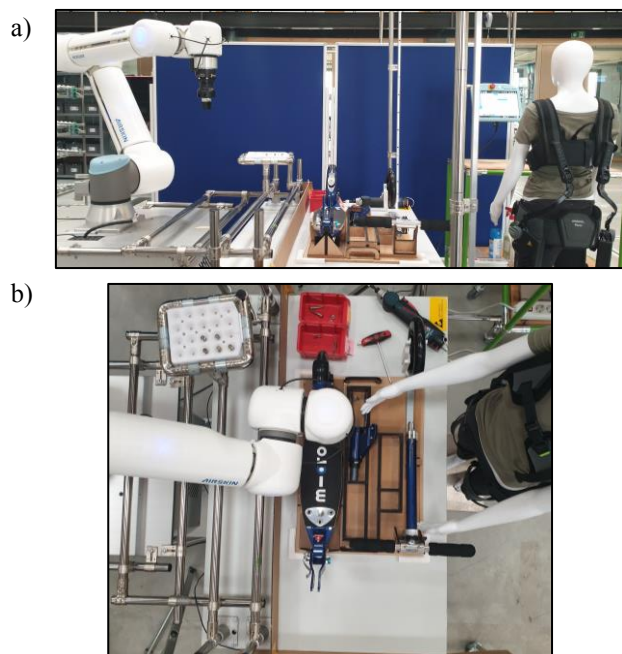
HRC-Assembly Station (a) lateral view (b) top view.
